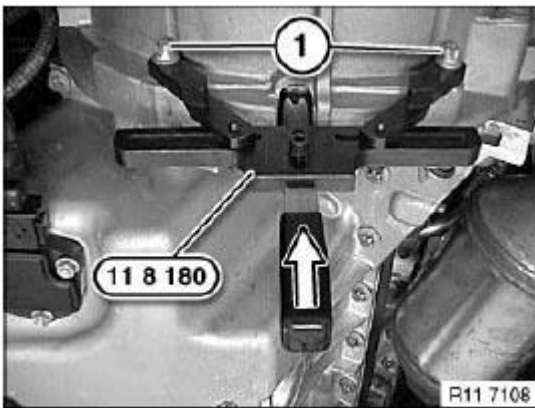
Mounting Special Tool (11 8 180) On Manual Transmission
